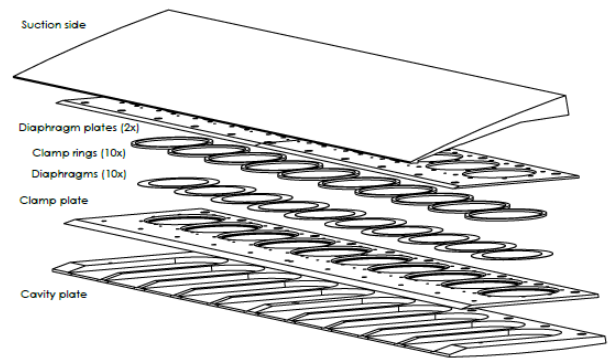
Exploded view of part of wind-tunnel model with ten integrated actuators
